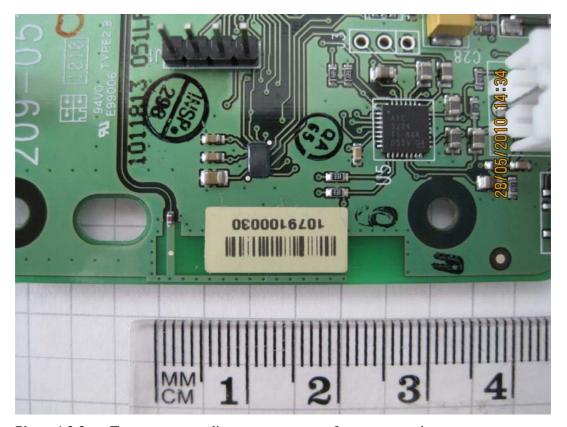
Test setup regarding measurement of antenna requirement
